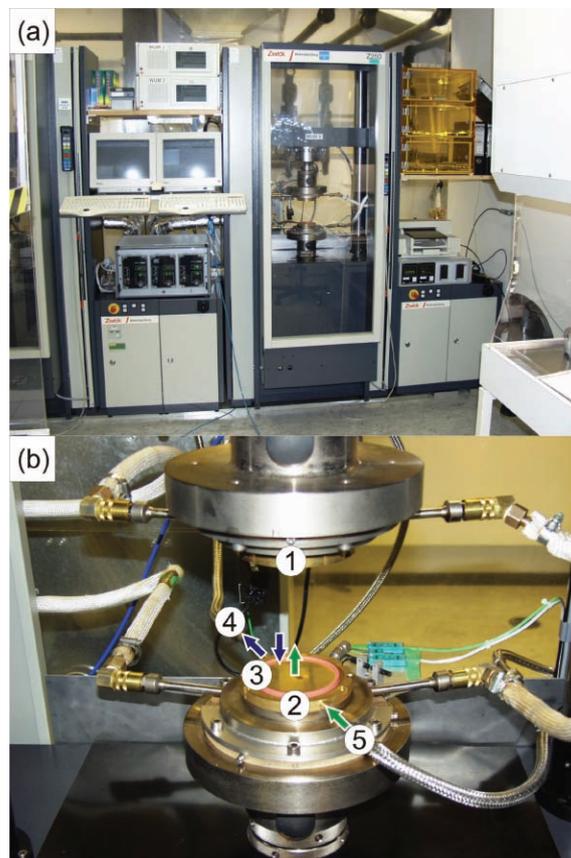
Thermoforming machine and tool: (a) Machine for micro pressure forming on a laboratory scale based on a converted hot embossing press (Jenoptik, Jena, Germany; type WUM) provided with (b) a corresponding microthermoforming tool ((1) micromould, (2) counter plate with evacuation and gas pressurisation openings, (3) seal, (4) vacuum, (5) compressed nitrogen). (b) Reproduced with permission;^[49] Copyright 2008, The Royal Society of Chemistry.
